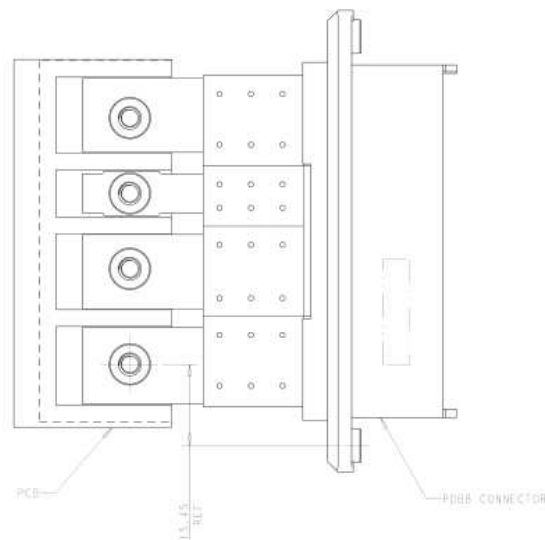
Reference Product View of Pluggable Bus Bar 125A PCB Screw-mount conn. P/N: 2204600-1
